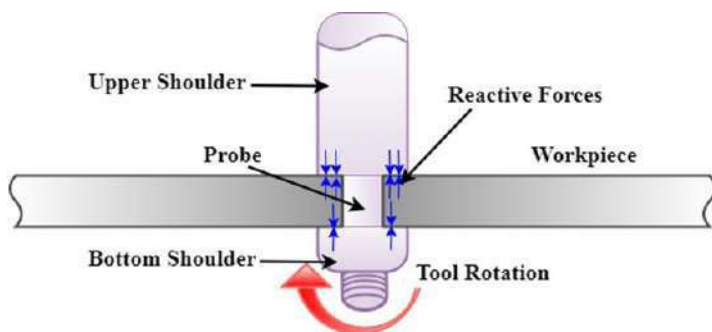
Schematic of self-reactive or bobbin tool FSW [14].
